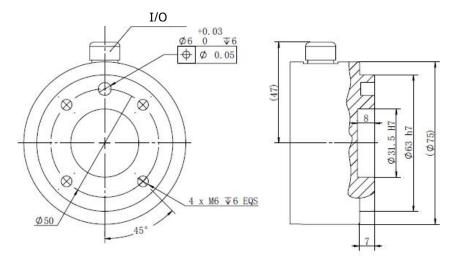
Mechanical dimensions of end-effector flange, unit: mm.
